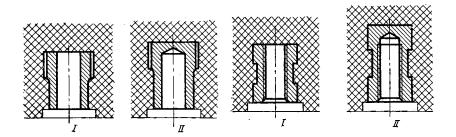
Inserts for blind holes I—incorrect; II—correct
